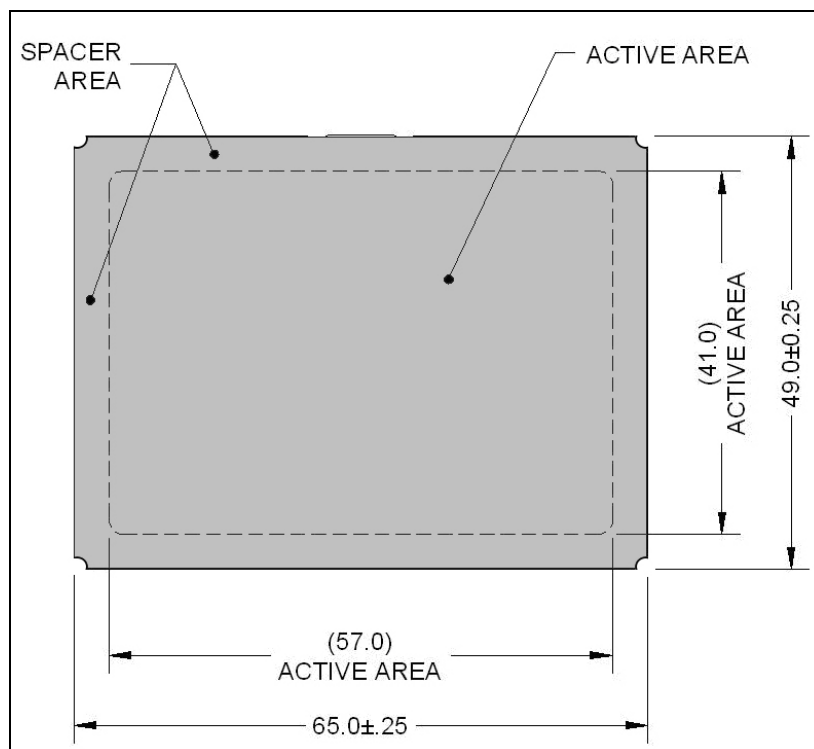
Top View of VersaPad sensor showing hidden spacer geometry. Dimensions are in mm.
